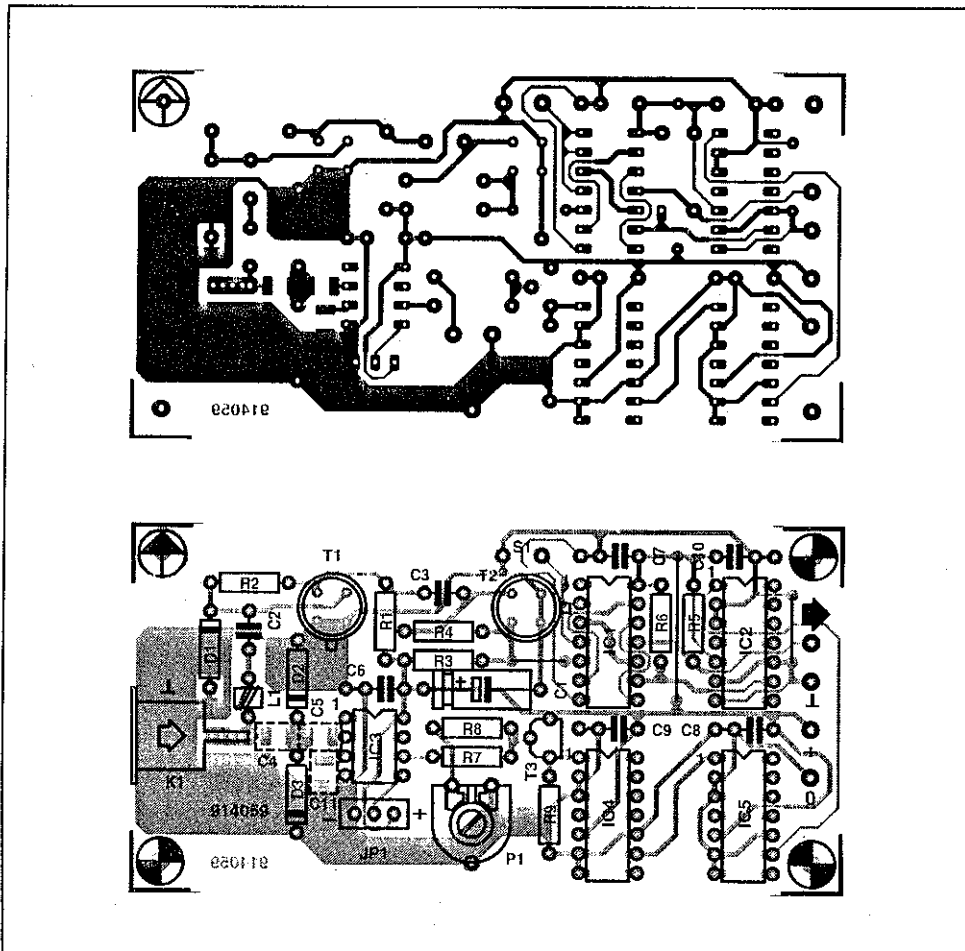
Printed circuit board for the 1.3 GHz prescaler.
